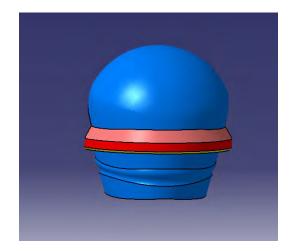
Back view design of the bracket Smart Safety Helmet.
